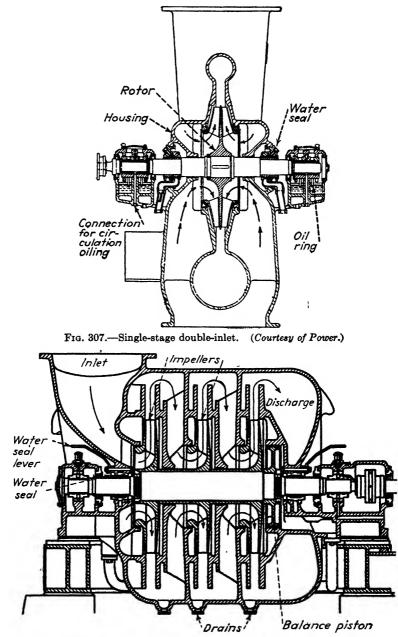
Multistage uscooled machine with balance piston. (Courtesy of Allis-Chalmers Manufacturing Co.)
